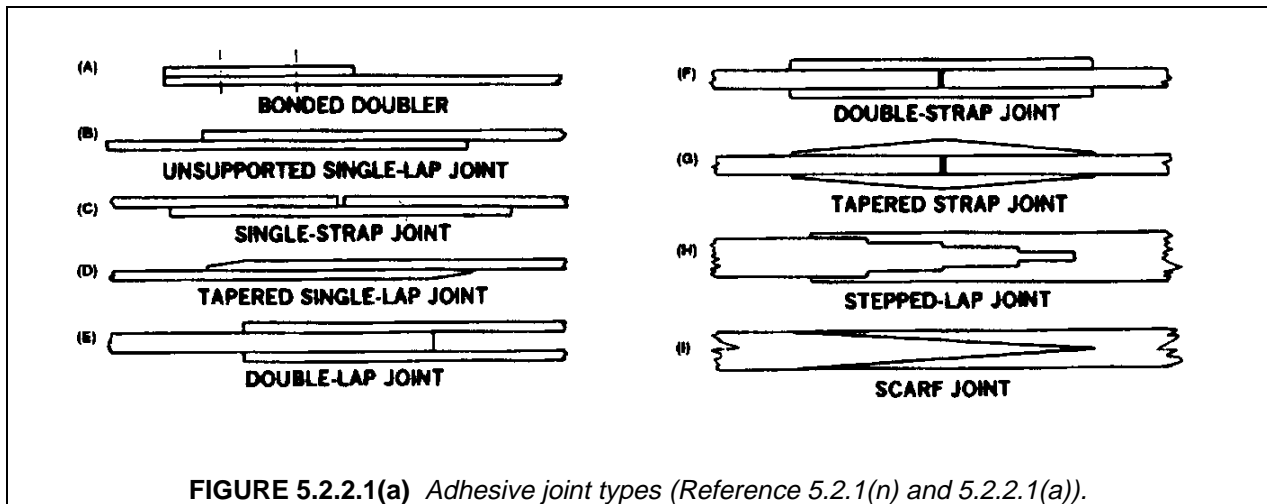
(a) Adhesive joint types (Reference 5.2.1(n) and 5.2.2.1(a)).
